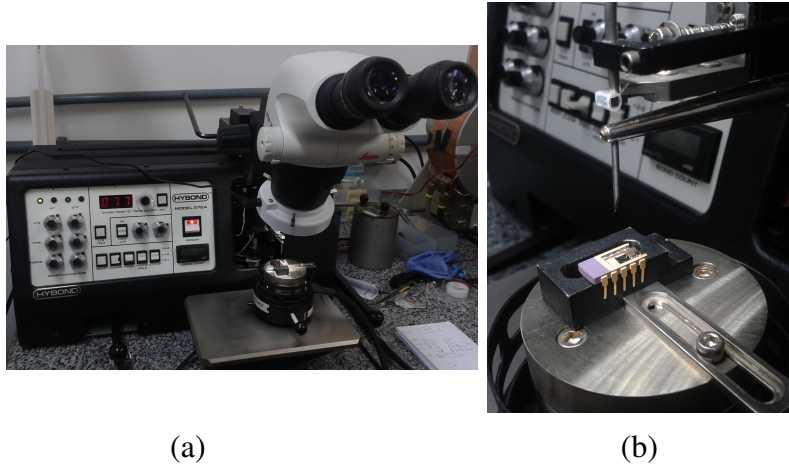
Bonding machine. CBPF, Rio de Janeiro, Brazil
